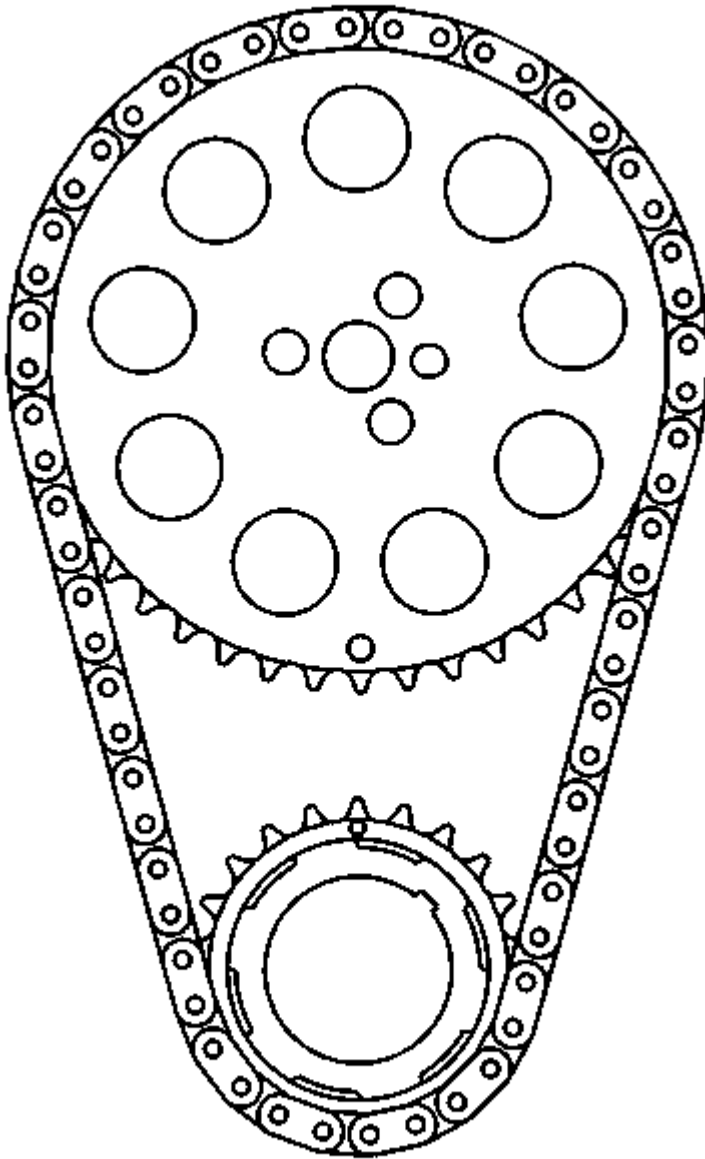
View Of Camshaft & Crankshaft Sprockets Timing Marks Aligned
